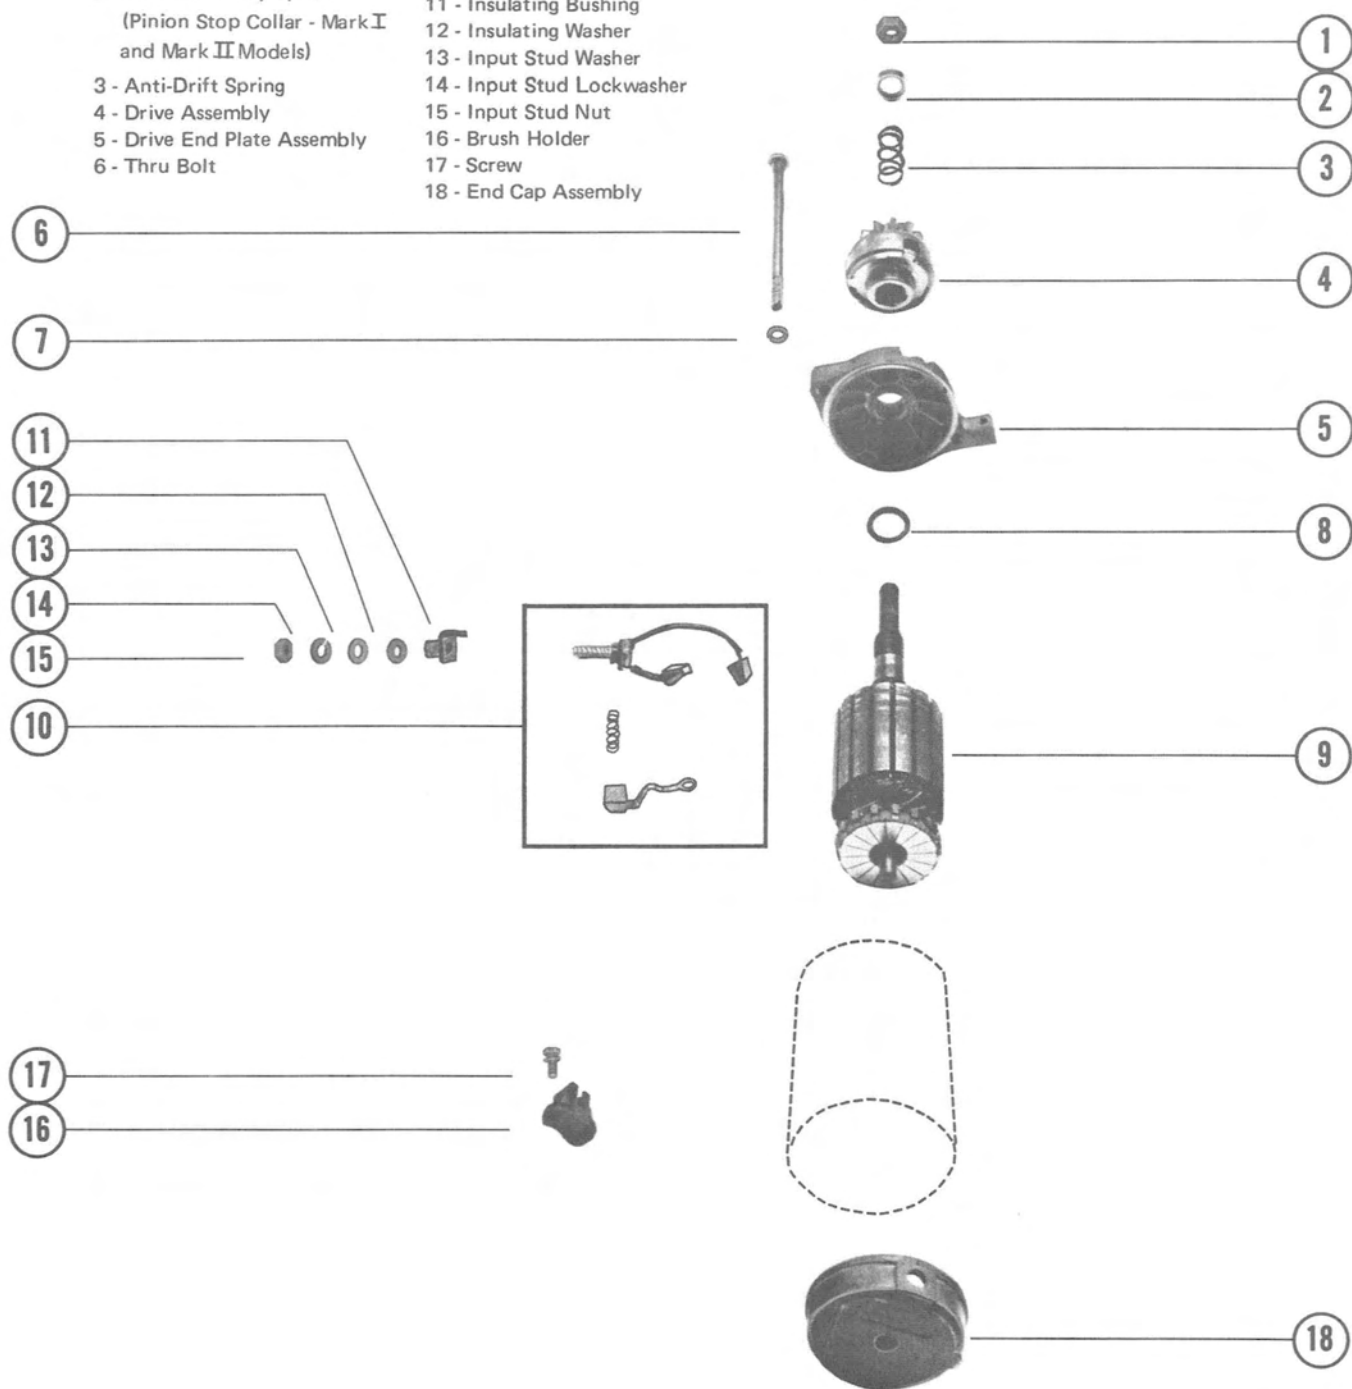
Starter Motor Exploded View - Hurricane, Mark I and Mark II (644cc)
